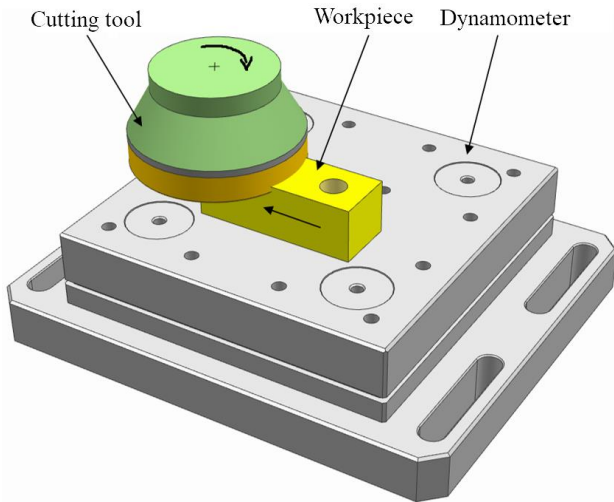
Workpiece placed on the Kistler 9255b dynamometer.
